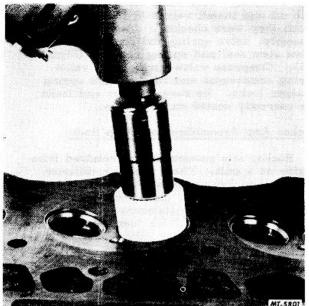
Grinding Valve Seat After grinding seats, check each seat for runout using dial indicator or run-out gauge I from SE-1631 seat grinder set (Figure 135). Seat run-out should not exceed specified limits (See SPECIFICATIONS).
